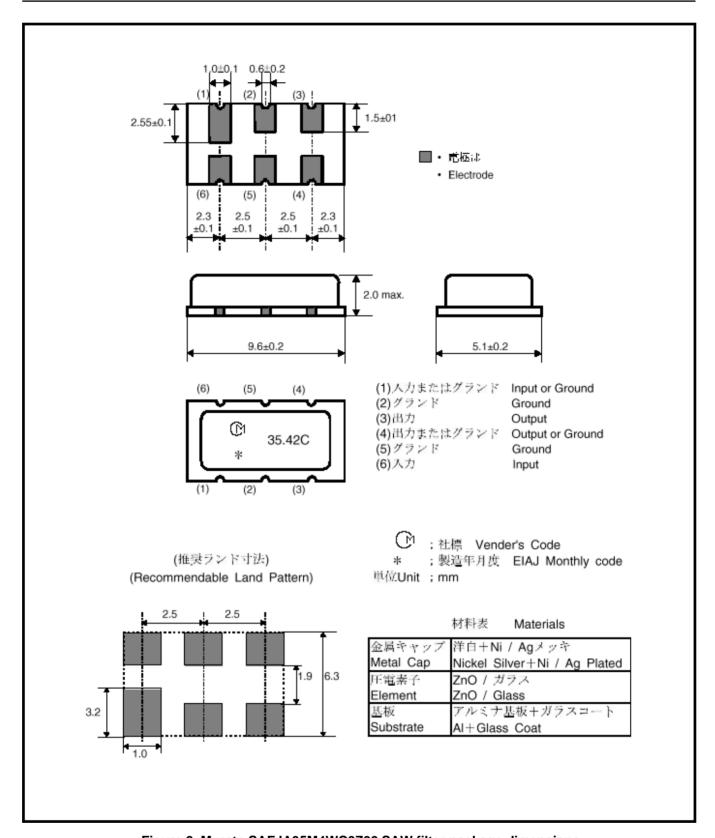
Murata SAFJA35M4WC0Z00 SAW filter package dimensions
